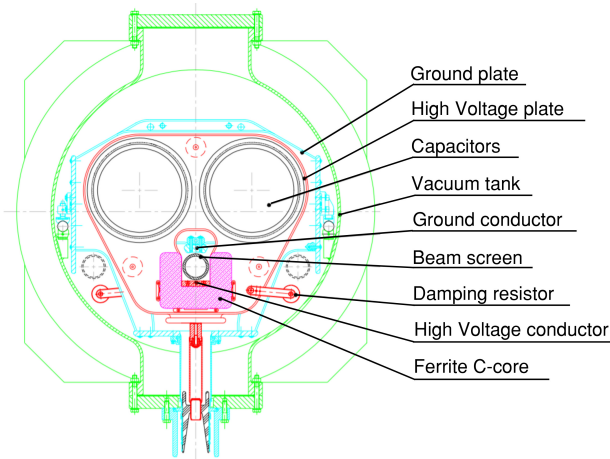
Drawing of the LHC MKI cross-section [51].
